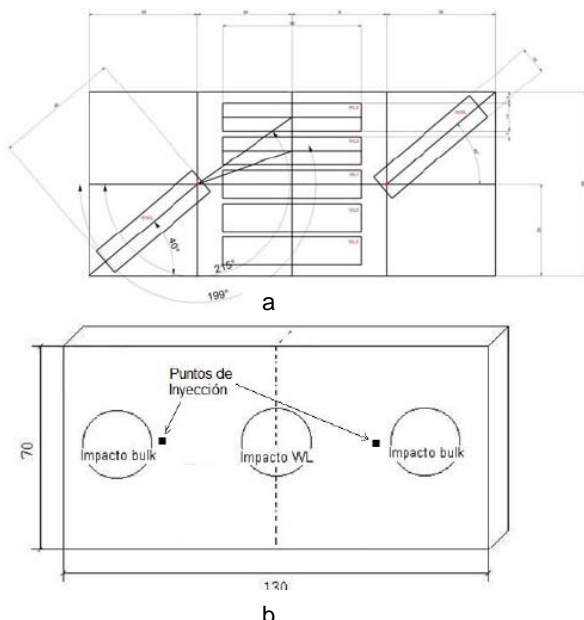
Layout of tensile (a) and disc (b) test specimens.
